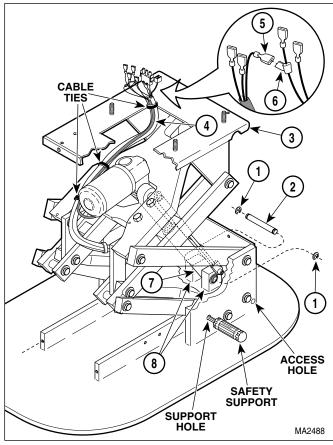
Base Actuator Assembly Disconnection/Connection
